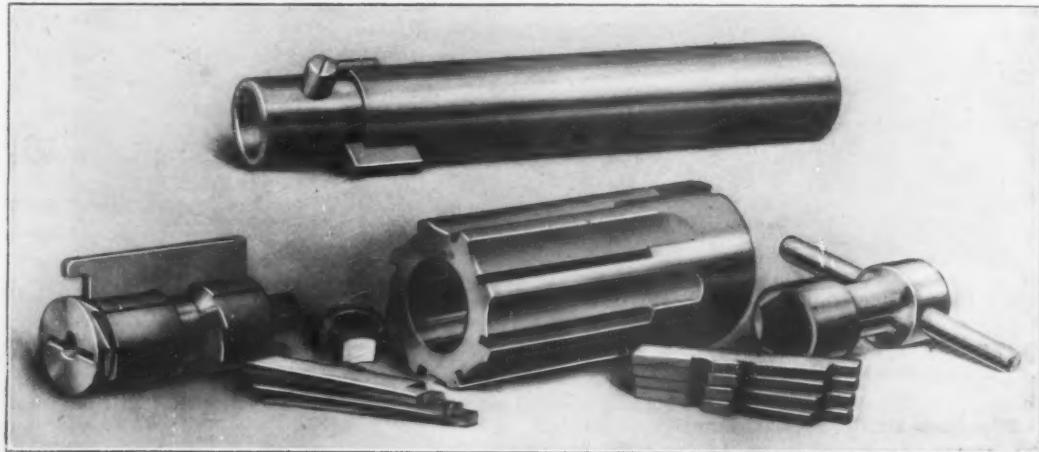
Parts of the One Lock Adjustable Reamer Made by the Wm. J. Smith Company, New Haven, Conn.
